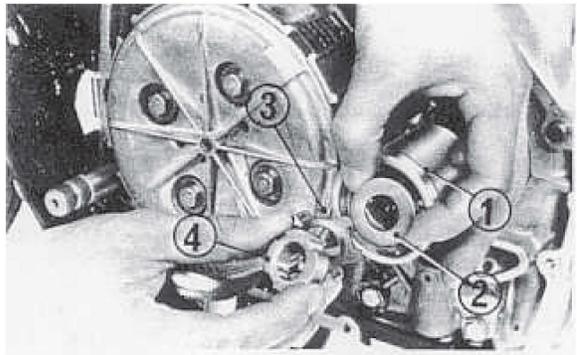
(1) Oil filter rotor (3) Lock washer
